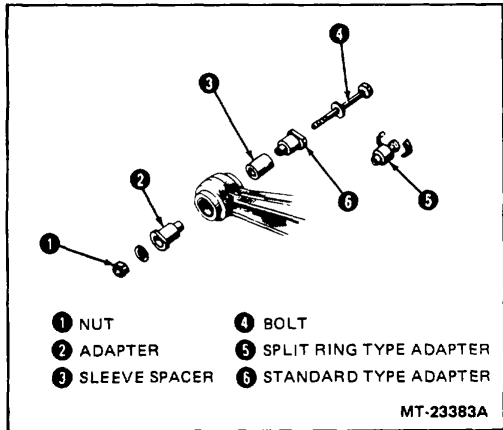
Three Piece Adapter Bolt Type Beam End Mounting
